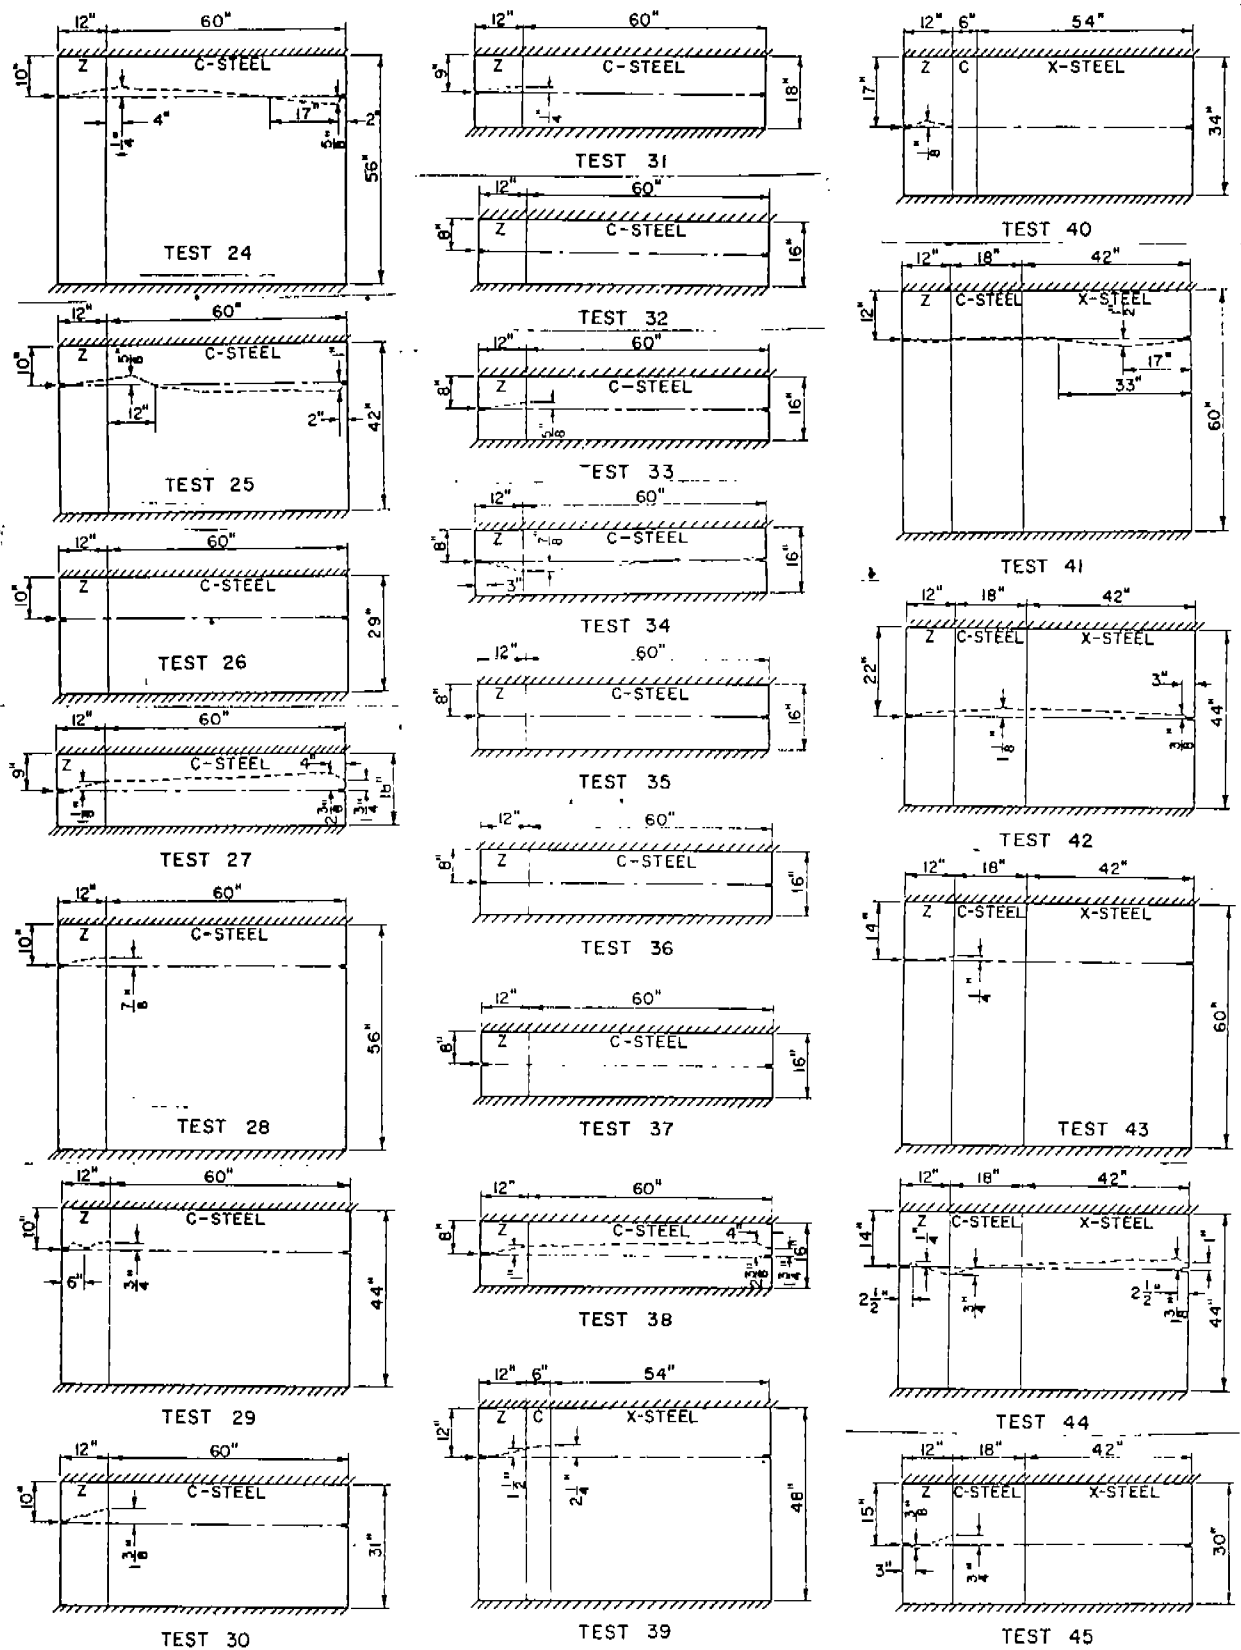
Specimen Inserts and Crack Paths--Tests 24--45.
